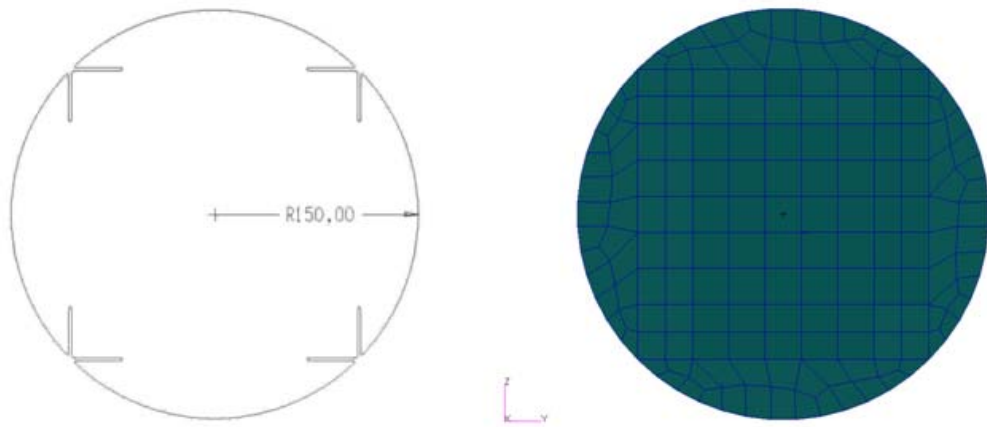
CAD Model and Structural Model of First Frame [mm]
